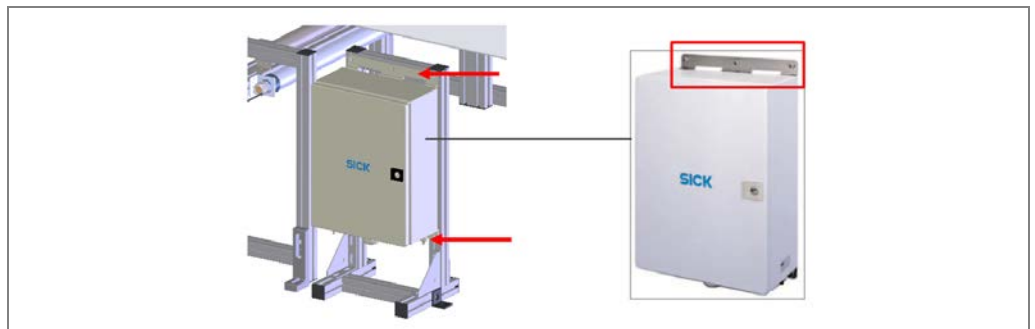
Mounting the controller cabinet on the transverse profile using the mounting kit
